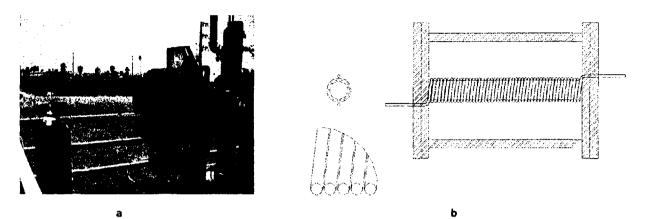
(a) Heat exchanger HX-205 leak rate test setup; (b) HX-205 redesign.
